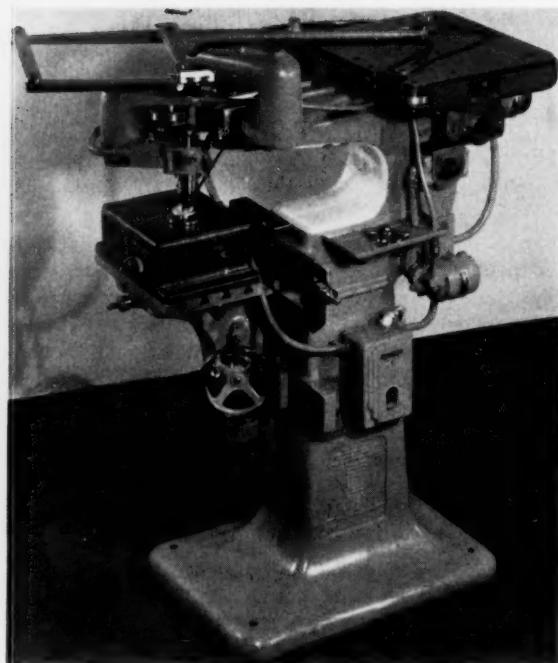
Master setup used in profiling tiny impeller shown in Fig. 3.
